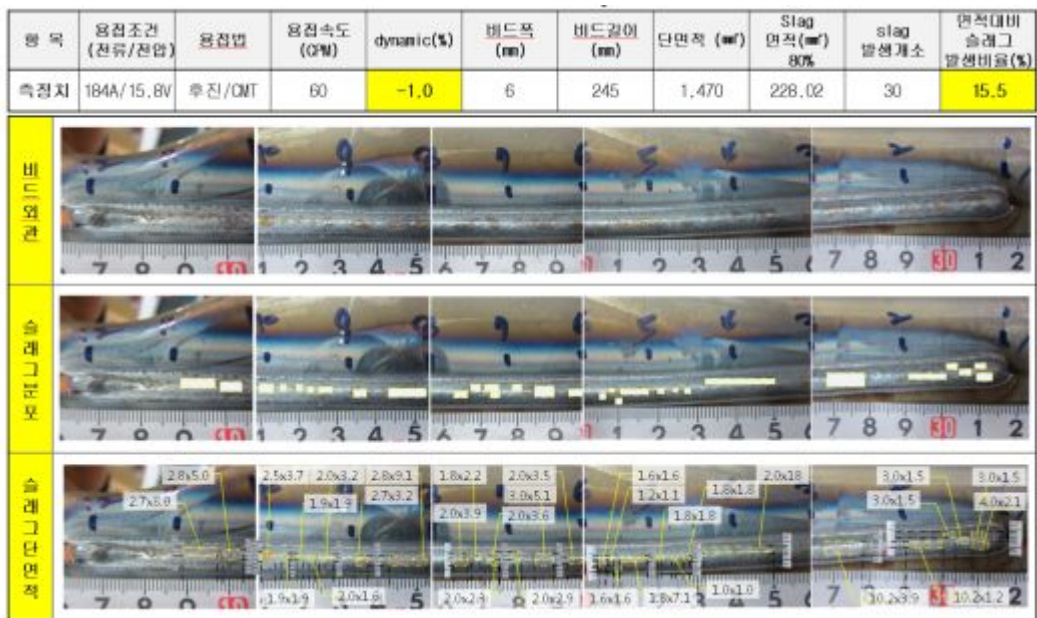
Dynamic-1.0%, Back step welding
